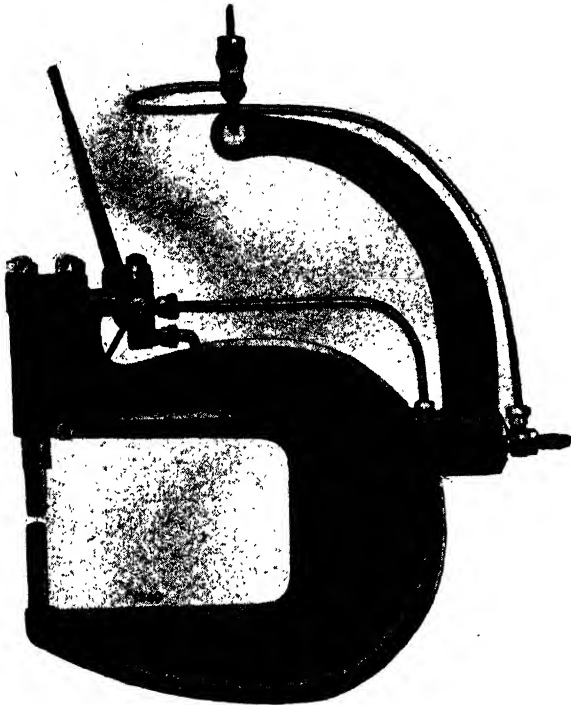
A PORTABLE HYDRAULIC RIVETER OF "BEAR TYPE"
